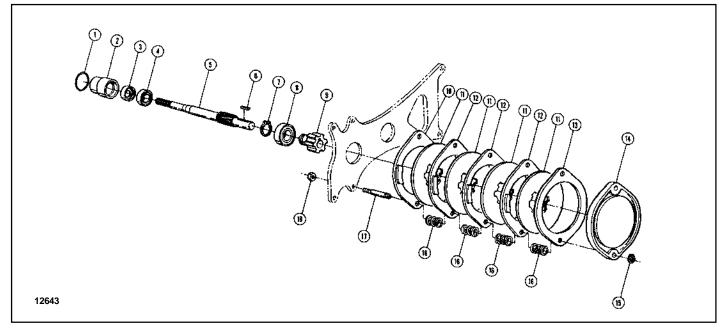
Motor Pinion Shaft and Motor Brake Parts - Hoist Gear Case
